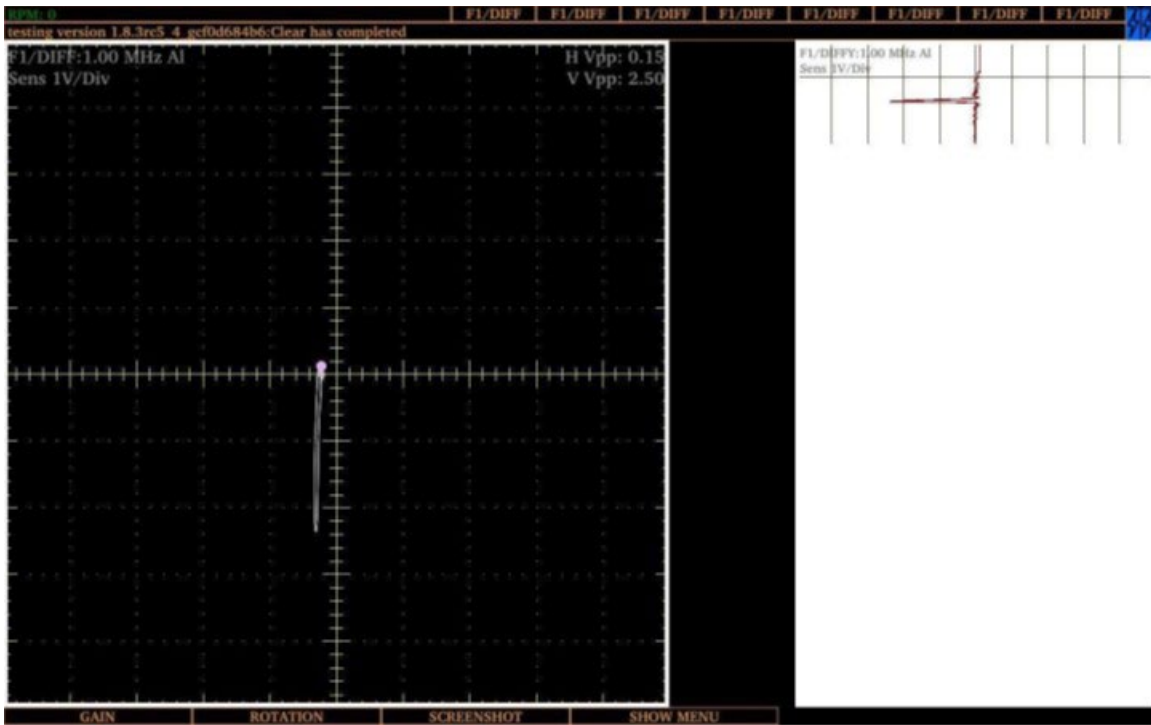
ET indication of defect at Location B in butt weld test panel TTCl-2
